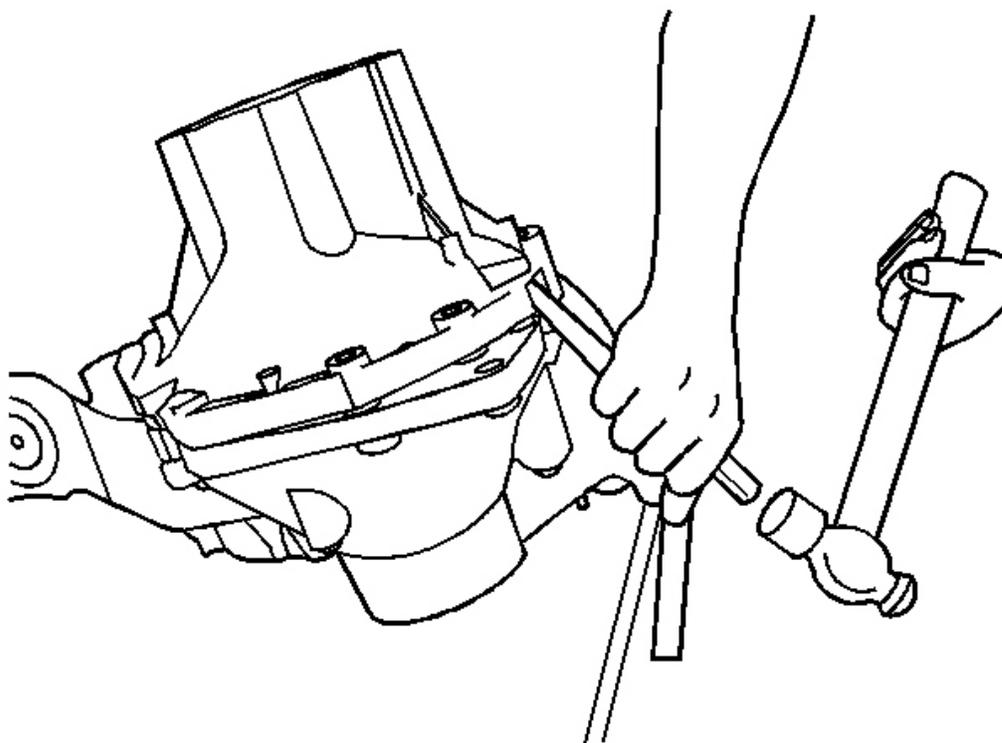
Separating Left & Right Carrier Case Half By Tapping On Carrier Case Lugs With Hammer
